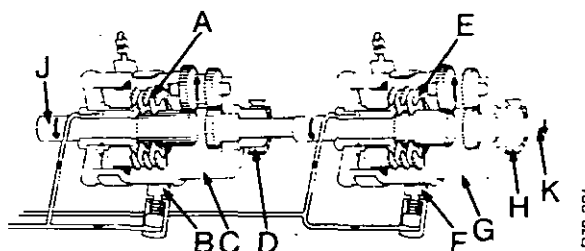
PLANETARY UNITS IN FIRST GEAR
